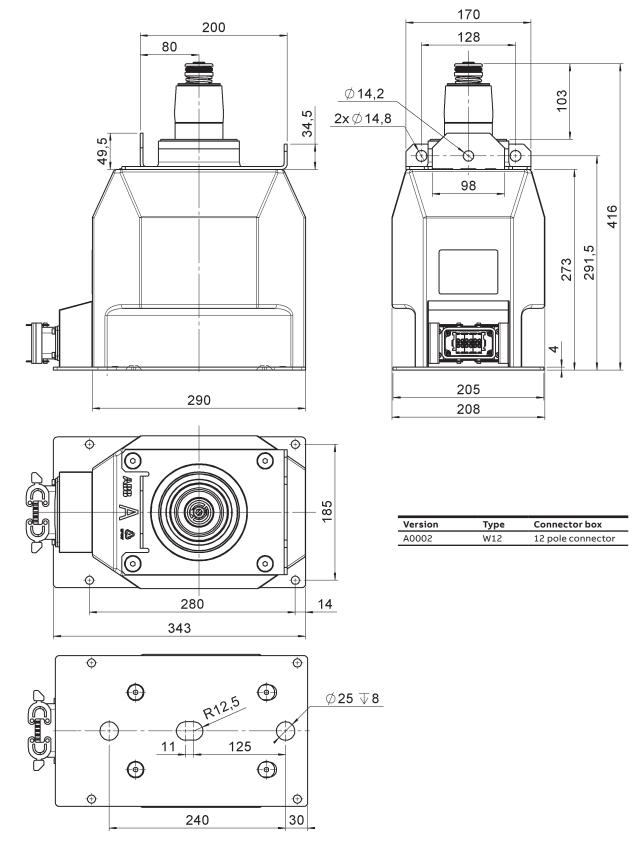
RKA023050A0001 Weight: appr. 41 kg
